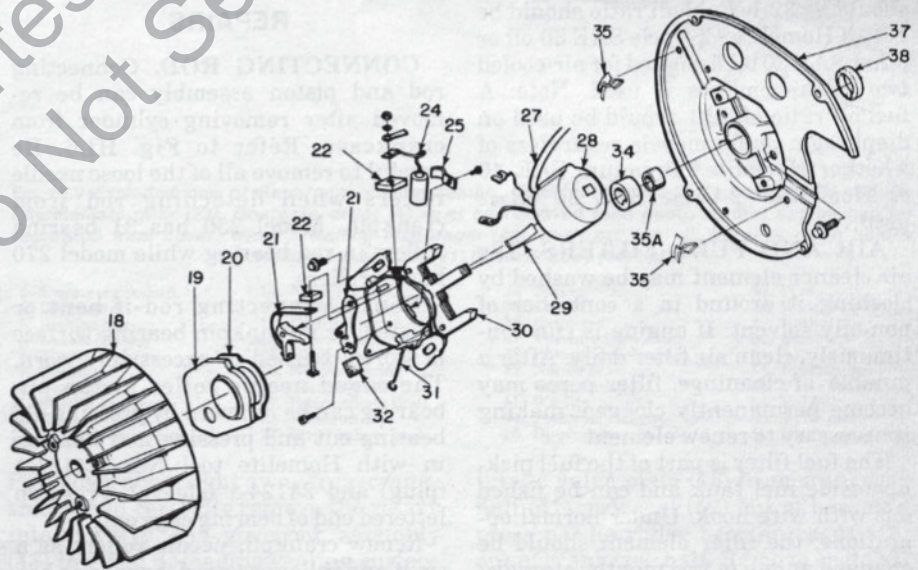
Exploded view of model 250 magneto assembly. Model 270 is similar. Magneto components are accessible after removing flywheel; refer to text. A zinc flywheel (magneto rotor) should be used on diaphragm pump engine; other model 250 engines use aluminum flywheel.
